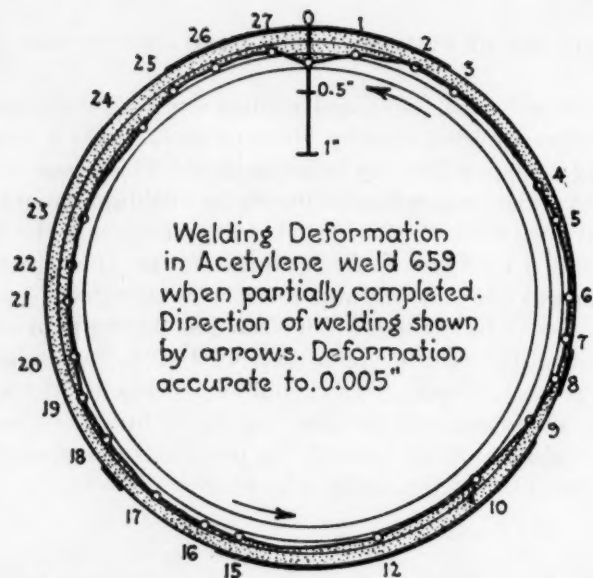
DEFORMATION DUE TO GIRTH WELD IN A 65-INCH PIPE LINE
